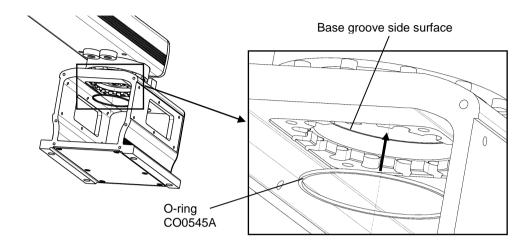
Mounting axis 1 base side O-ring (KHL-500, KHL-600, KHL-700)
